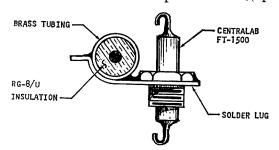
Solder lug is shaped to fit one-quarter way around the brass tubing.
